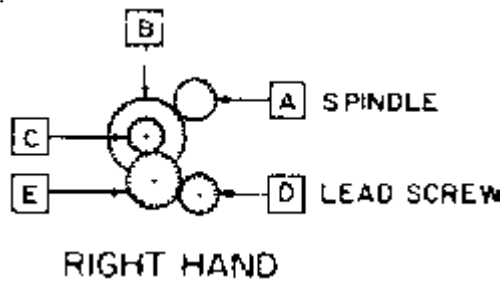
Gear Setup Diagram for Example. NOTE: See Figure 7 on page 8 for a detailed setup drawing.
